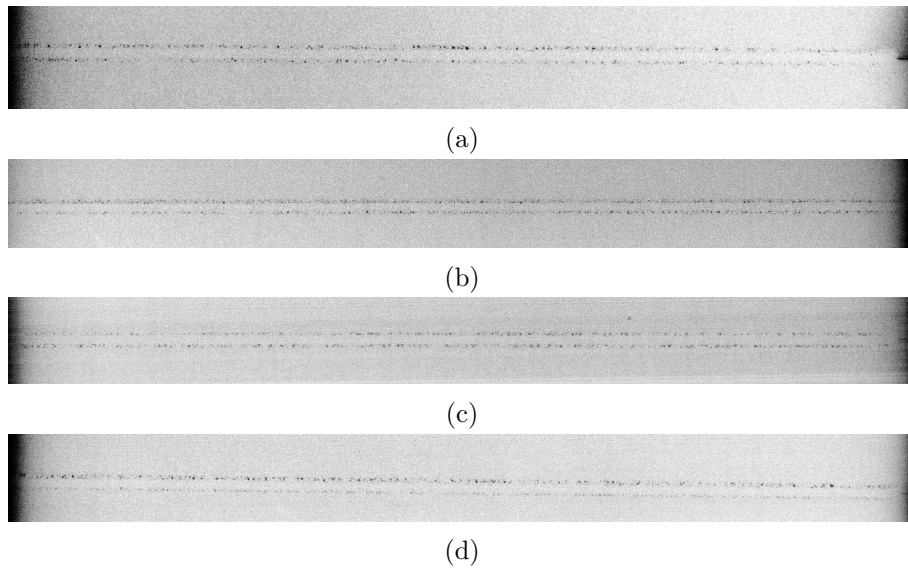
X-ray images of EB welds of TZM with cored wire filler: (a) V2P3, (b) V3P1, (c) V3P2, and (d) V3P3. Continuous porosity is detected along the edges of the weld bead.
